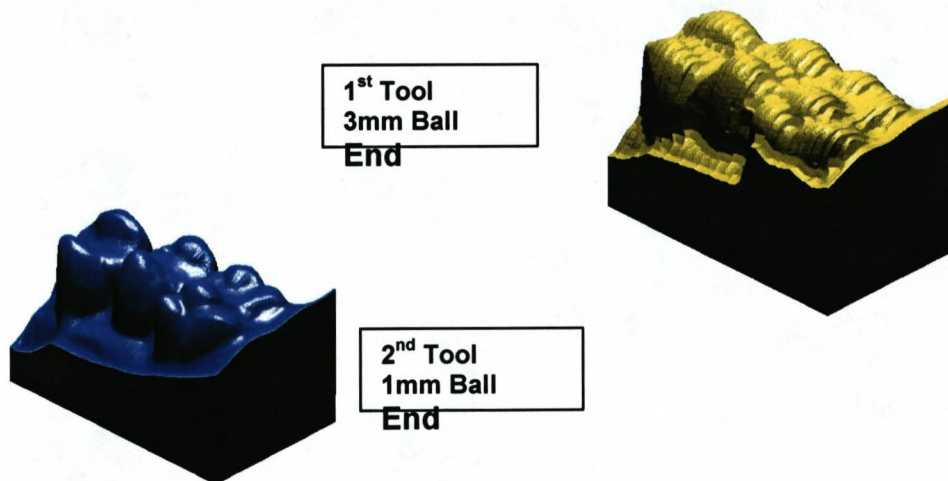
The tool path generation can be verified using the Virtual Machining Module
